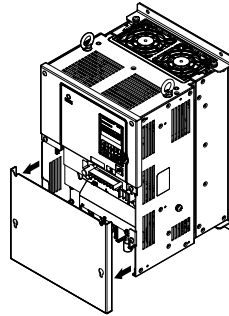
Removing the Terminal Cover on an IP00/Open Type Enclosure Drive
